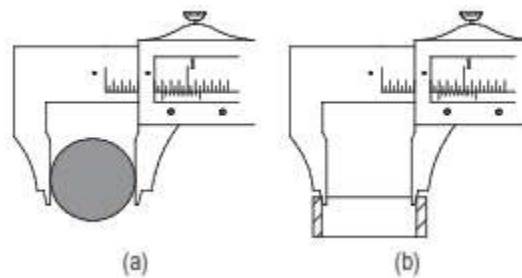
Measurement of dimensions (a) Outside dimension (b) Inside dimension
